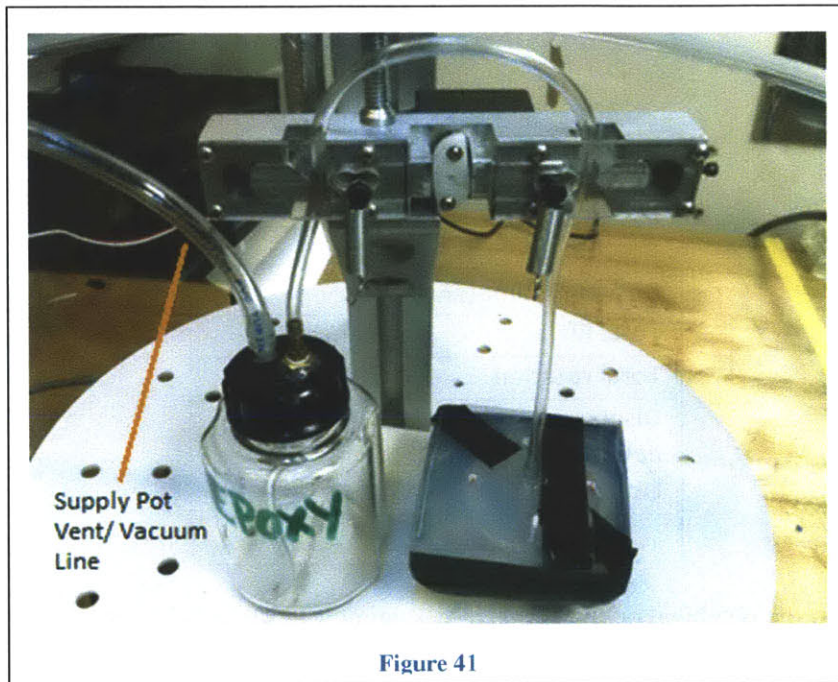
shows the pinch valve in operation with a small silicone mold. This is all inside the vacuum chamber.
